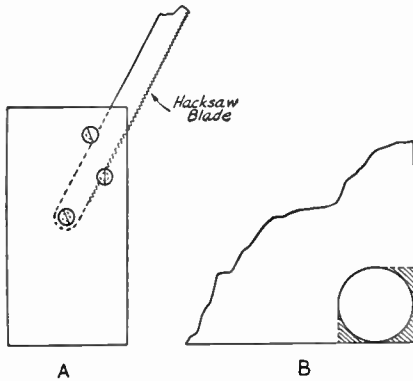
To cut rectangular holes in a chassis corner, holes may be filed out as shown in the shaded portion of B, making it possible to start the hack-saw blade along the cutting line. A shows how a single-ended handle may be constructed for a hack-saw blade.
